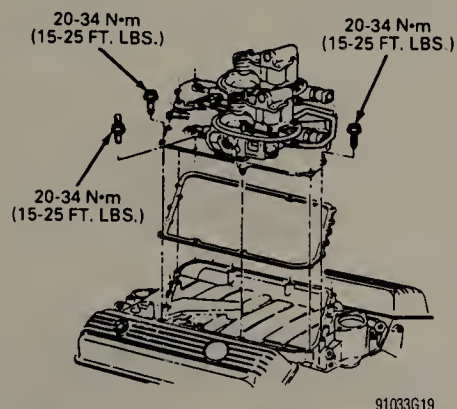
The TBI assembly/intake cover retainers must be tightened to the proper specifications
